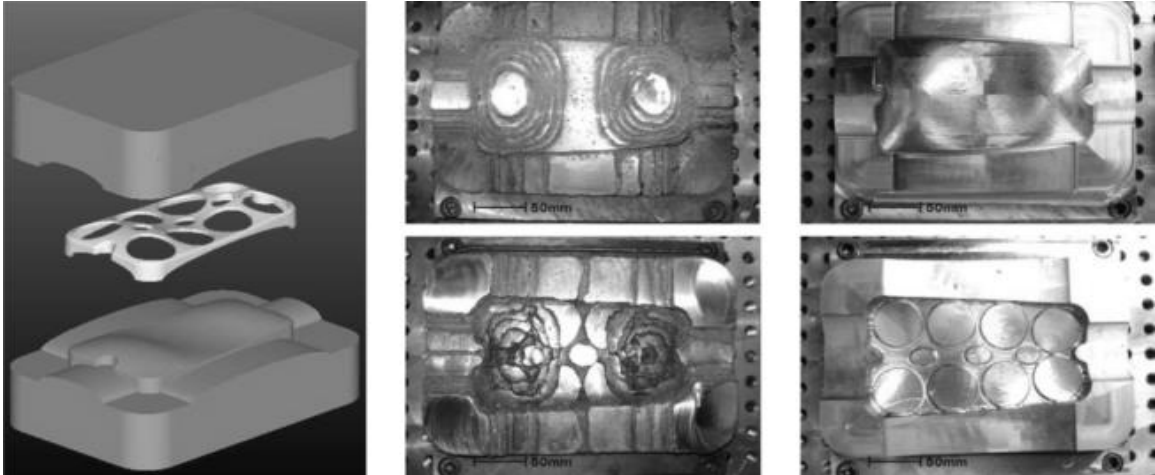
A) CAD Model of Part and Injection Molds B) Near-Net Shape Molds C) Finished Molds [39]
